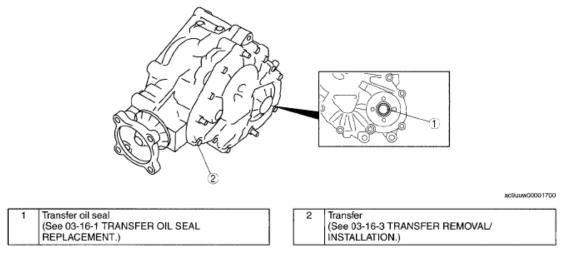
Identifying Transfer Oil Seal And Transfer Courtesy of MAZDA MOTORS CORP.
